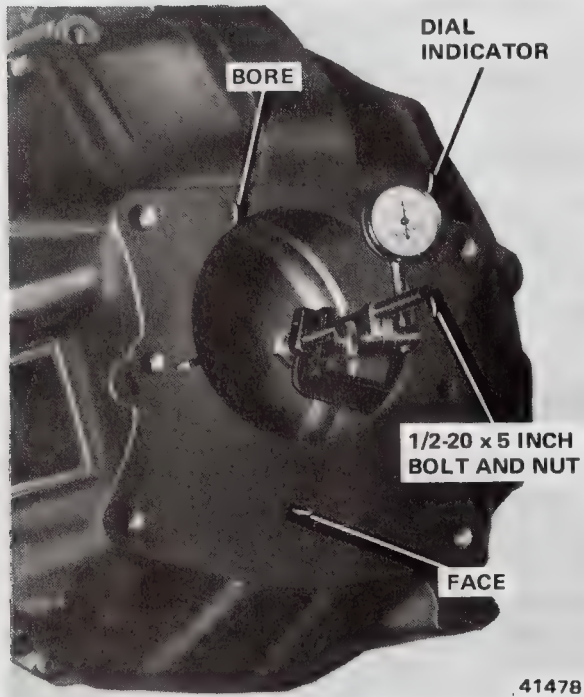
A-8 Checking Face Runout Of Clutch Housing
